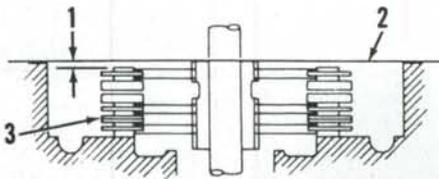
Place a straightedge (2) across brake cover mounting surface and measure gap (1) between straightedge and top brake disc. Install extra stationary plate at location (3) only if necessary to bring disc height within specifications.
